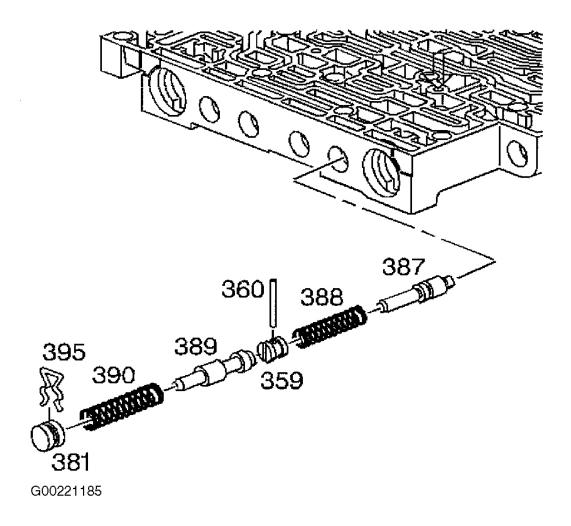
Removing/Installing 3-2 Downshift Valve Assembly Courtesy of GENERAL MOTORS CORP.
